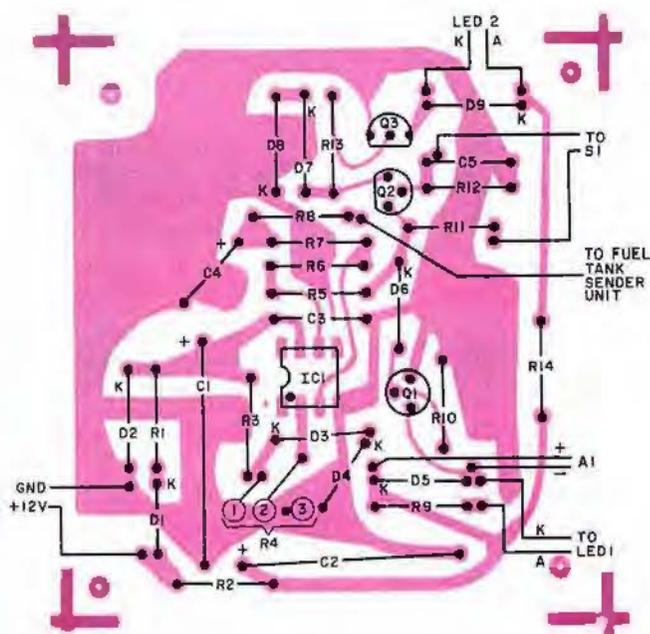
Actual-size etching and drilling guide is shown at left. Component placement guide is above.
